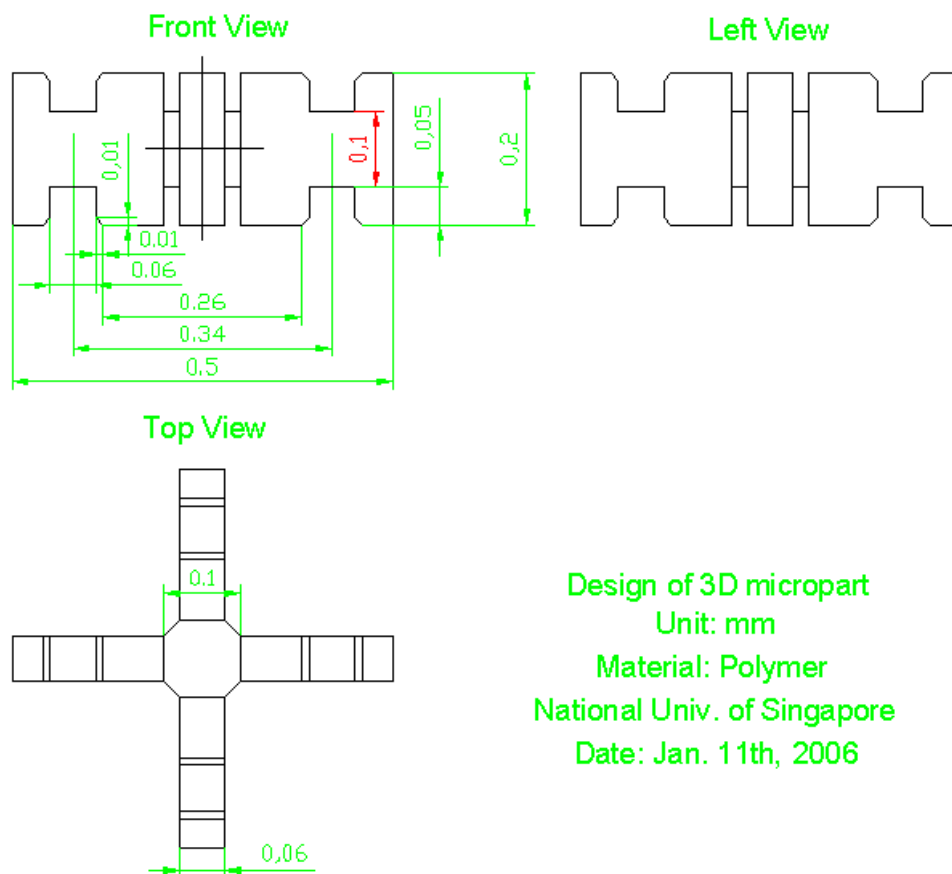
CAD drawing of the symmetric design of the micropart for micro-molding.
